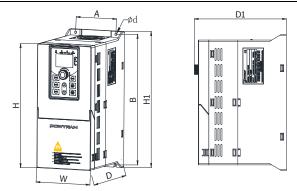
5.5-11kW G3 outline dimension (Frame No.: A1~A2)
